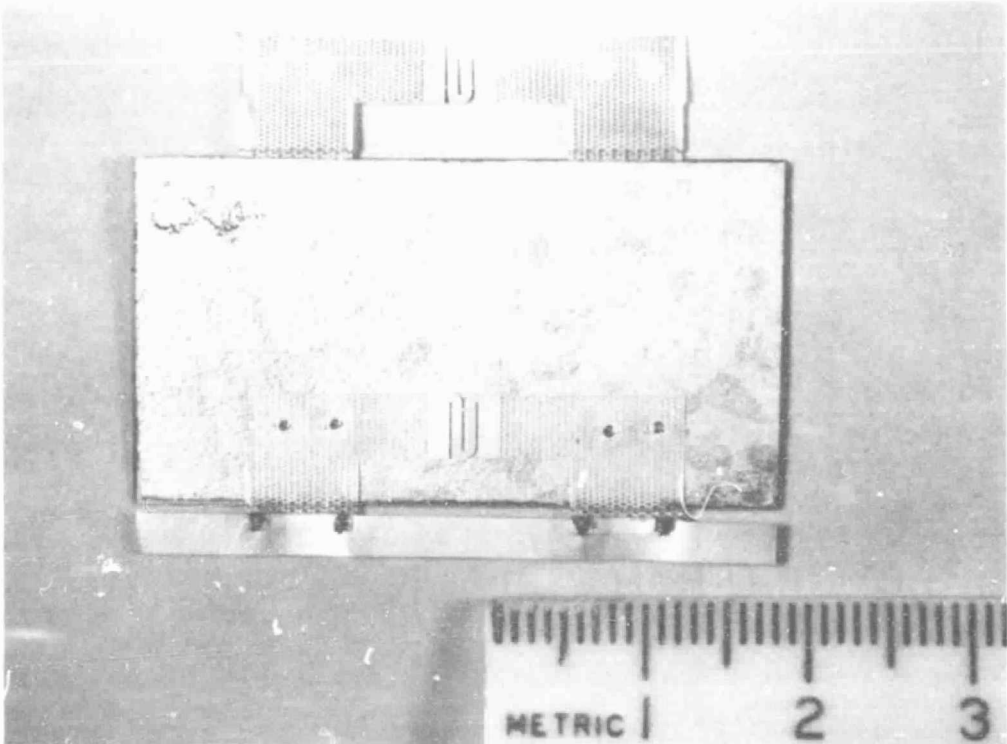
PARALLEL GAP WELDED CELL BACK
